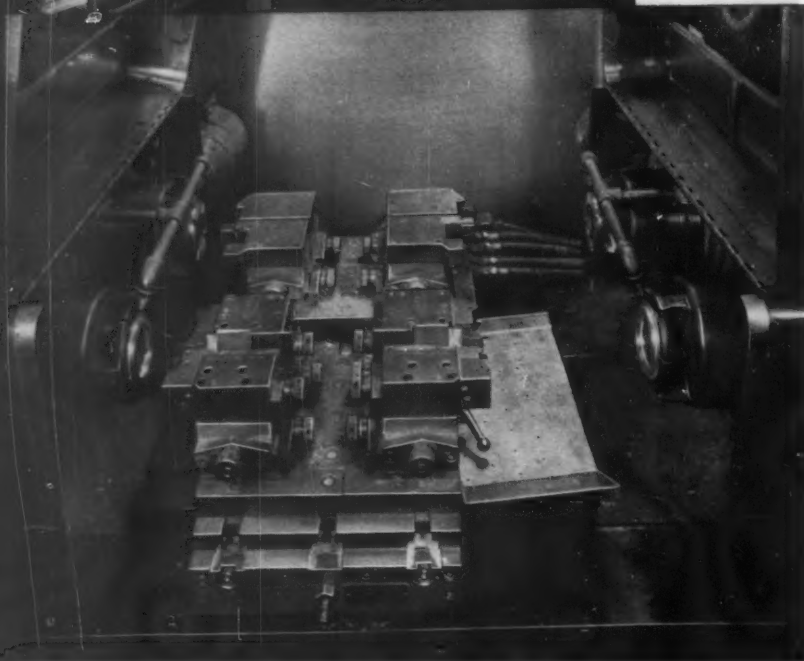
Double-end, four-spindle boring machine has twenty-eight carbide tools for turning, facing, chamfering, and boring torque-converter bearings.
